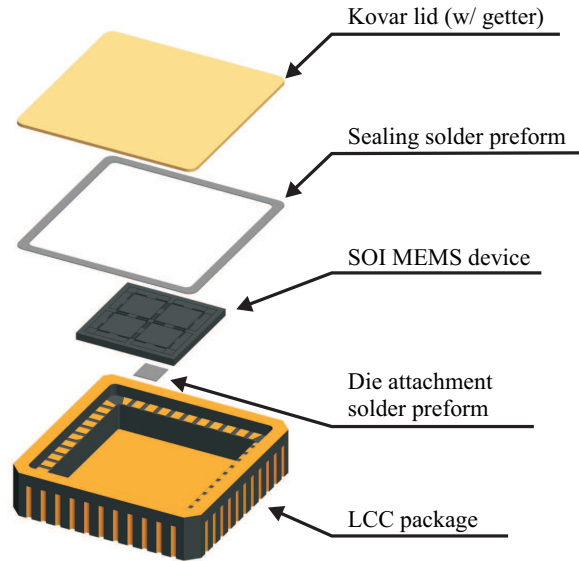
Exploded view of materials used for vacuum sealing process.
